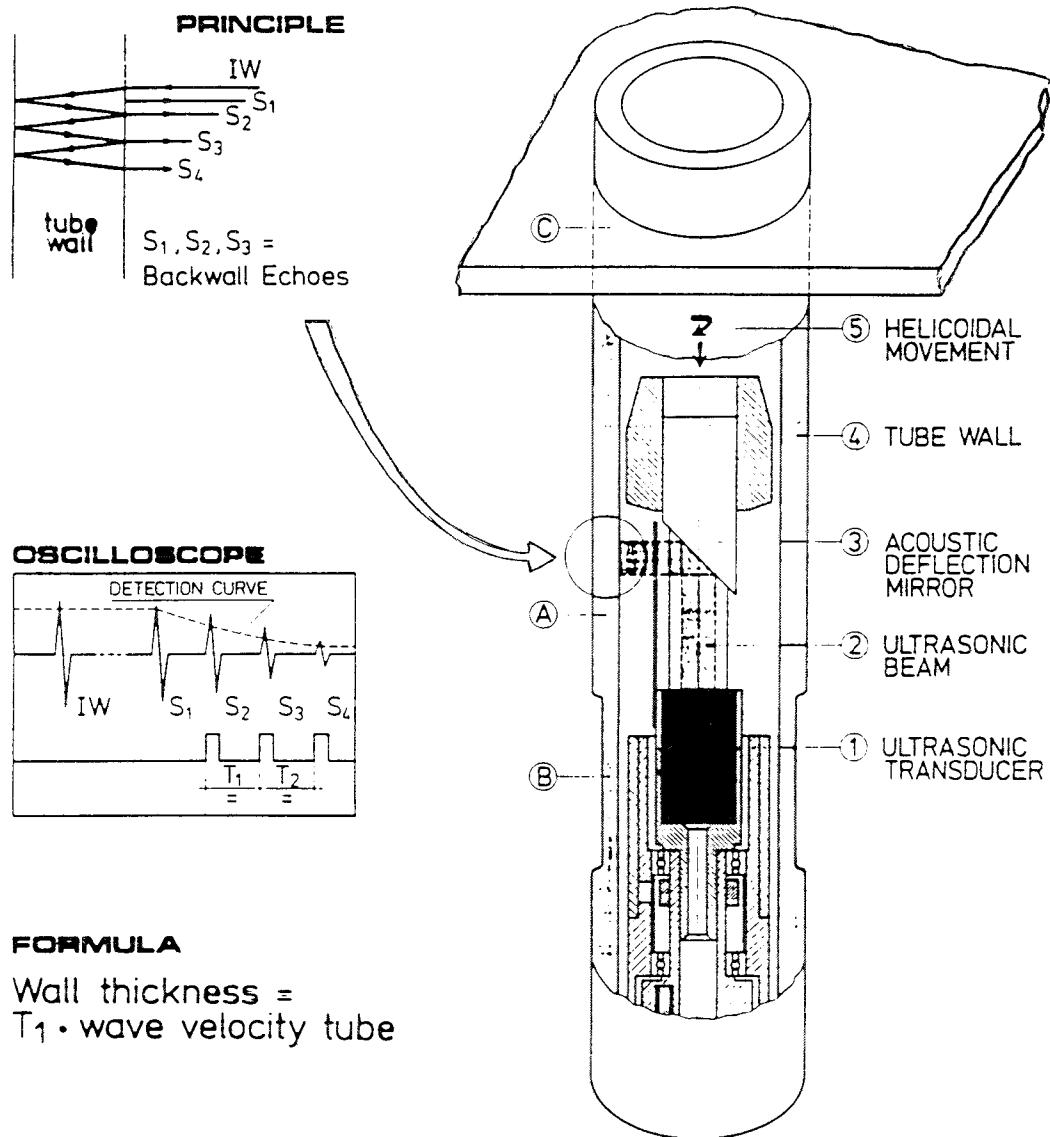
Typical Equipment for UT Inspection of Laser Welded Sleeves (28)
